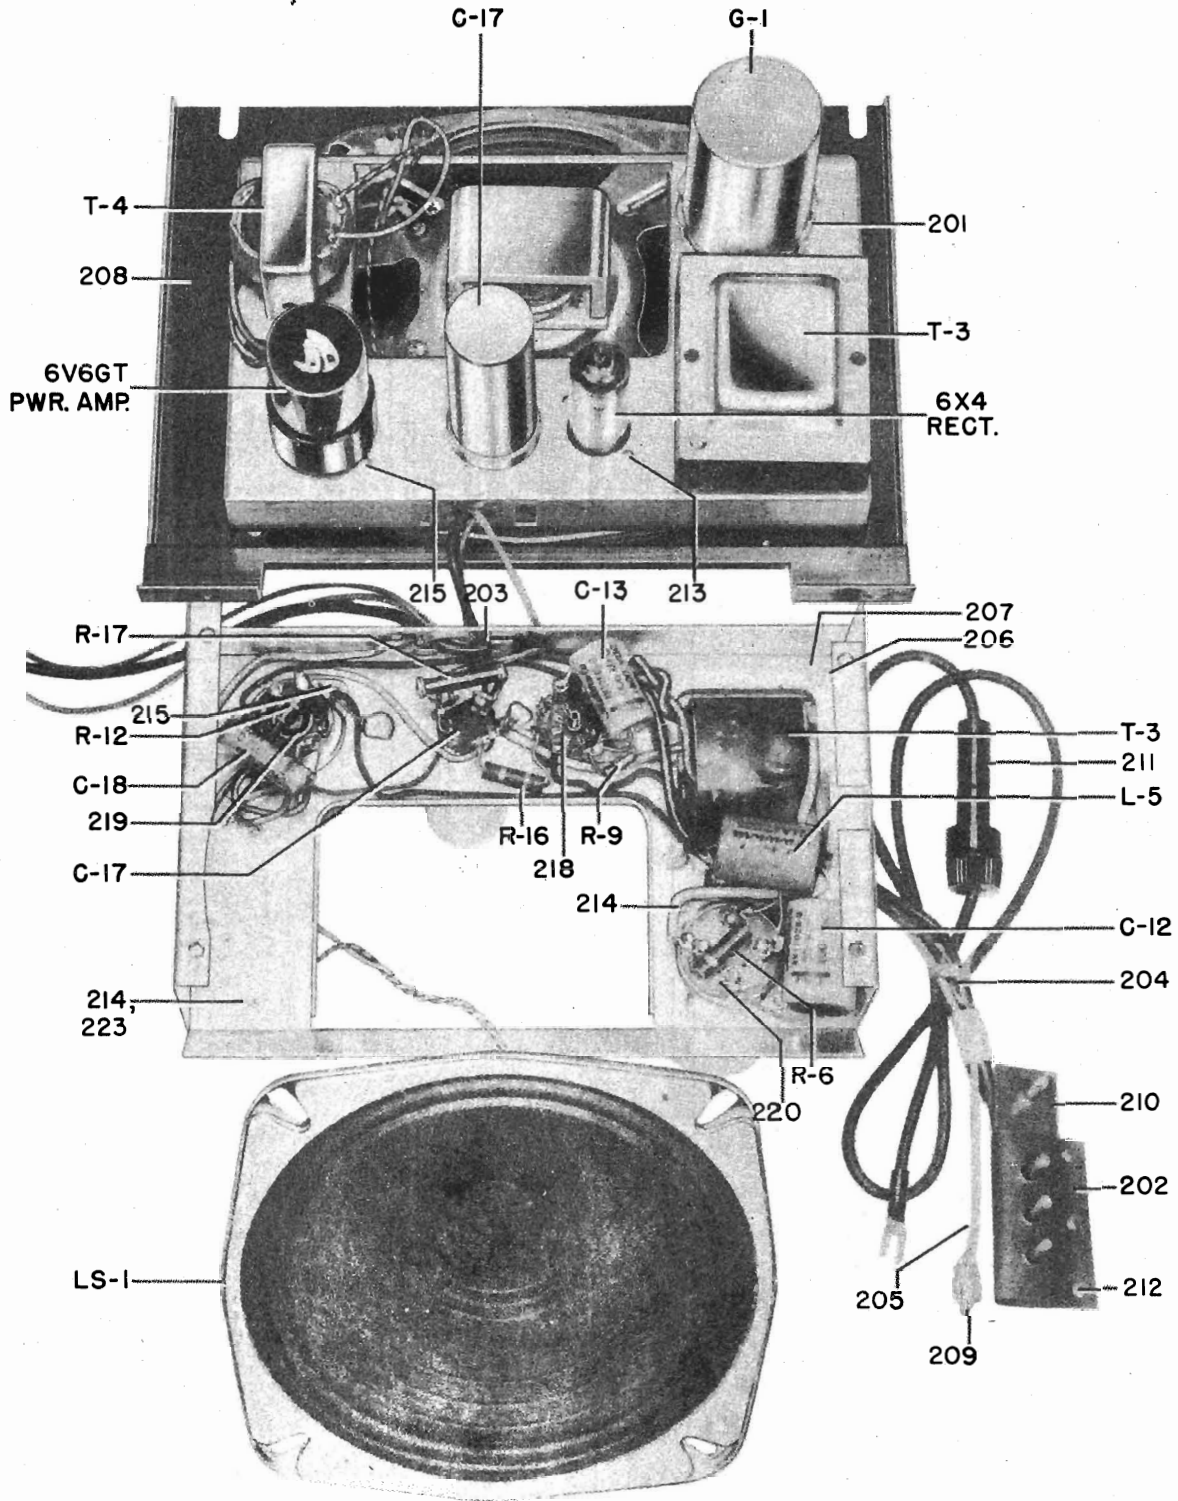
PARTS LOCATION - POWER & AUDIO UNIT
